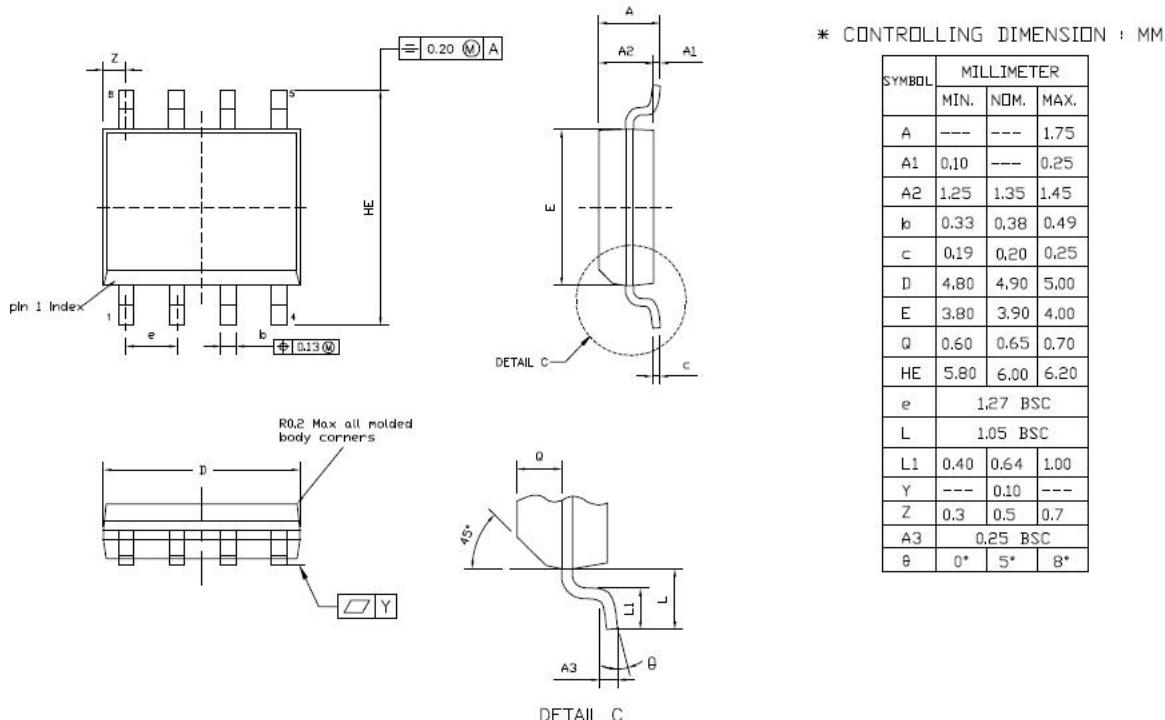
SOP8 Package Shape and Dimension in millimeters
